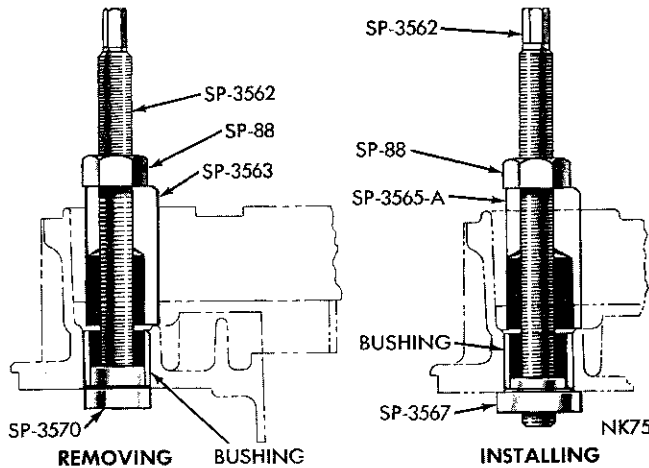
Removing and Installing the Pinion Housing Drive Shaft Bushing
